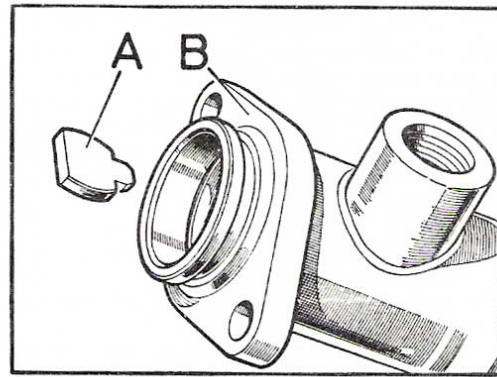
Valve piston operating lever (A) and Lockheed master cylinder (B)
